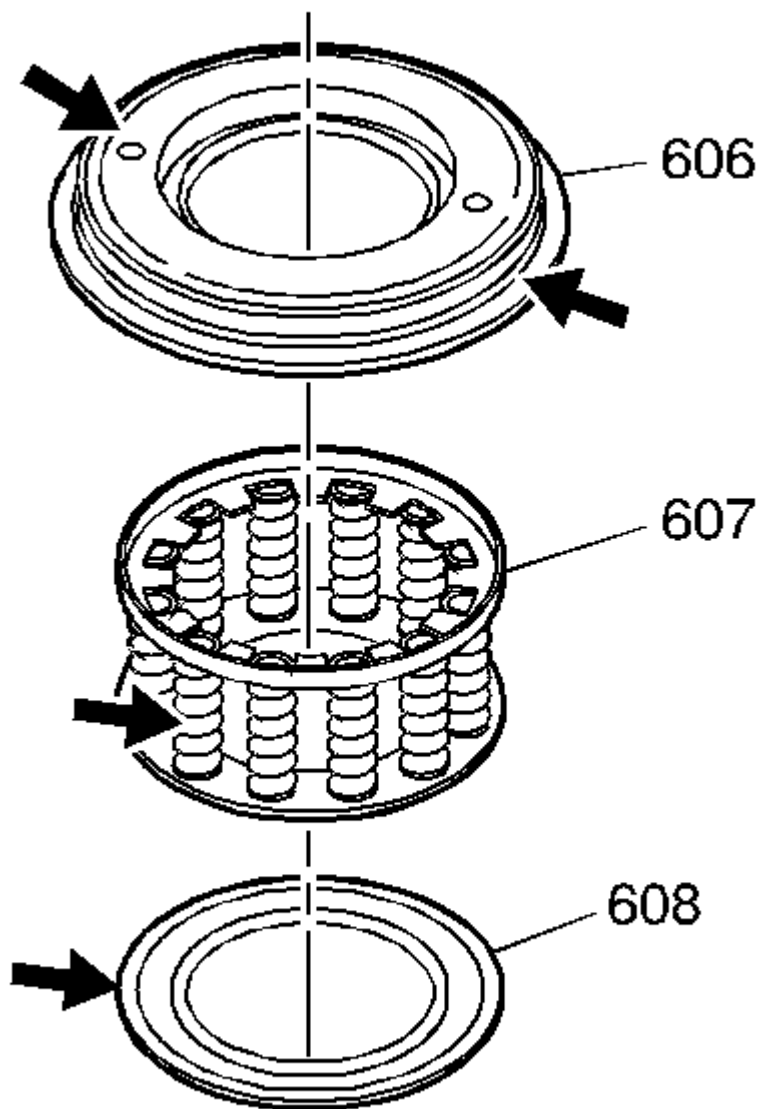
Inspection Areas On Third Clutch Piston Assembly Seals
